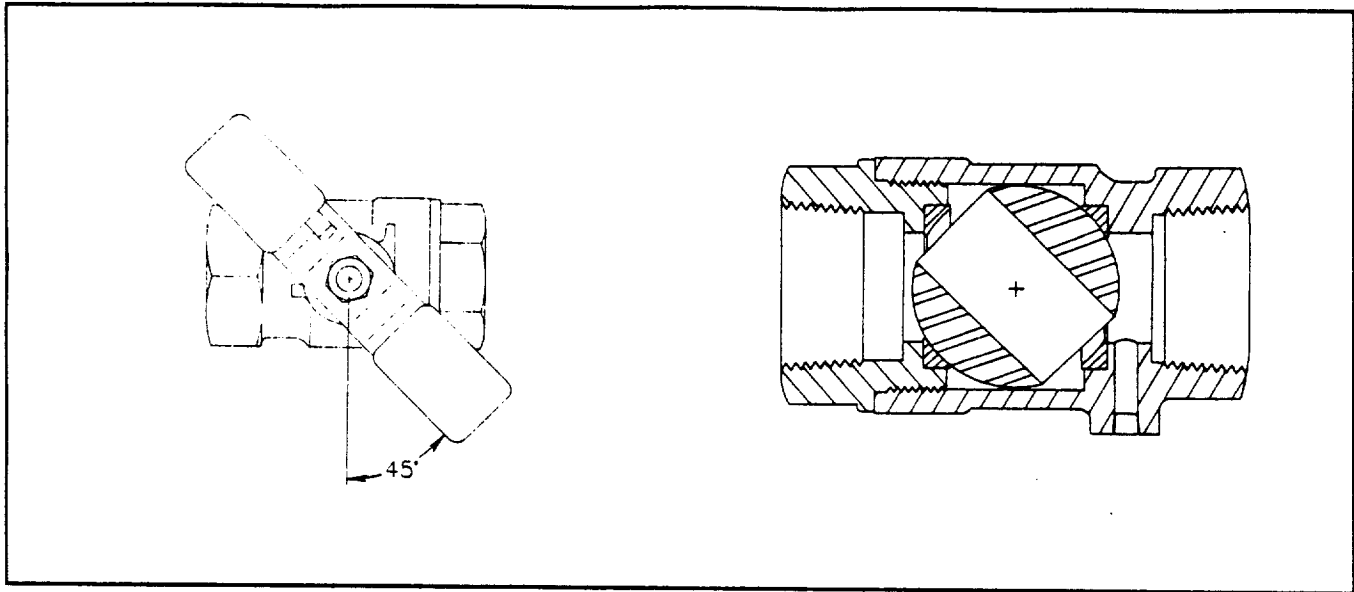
View Of Ball Valve In Half Open/Half Closed Position.
